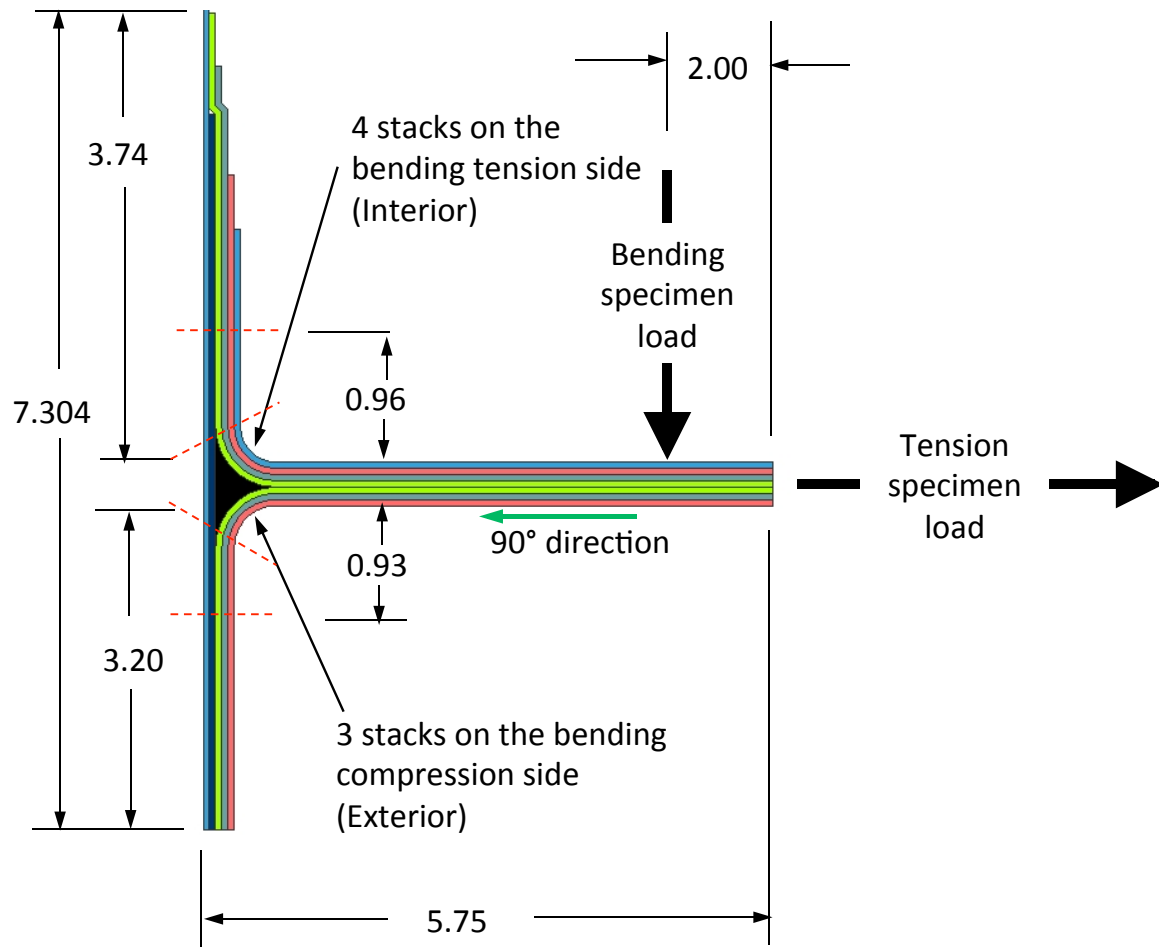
T-caps test article cross-section sketch. The stack 0-degree direction is perpendicular to the cross-section, and the specimens are nominally 2.9 inches wide. (Dimensions in inches)
